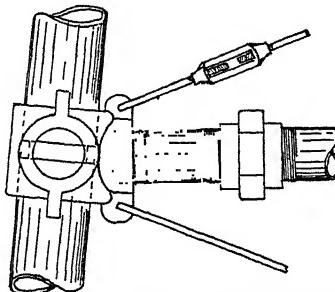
CABOT PIPE-DERRICK JOINT.
